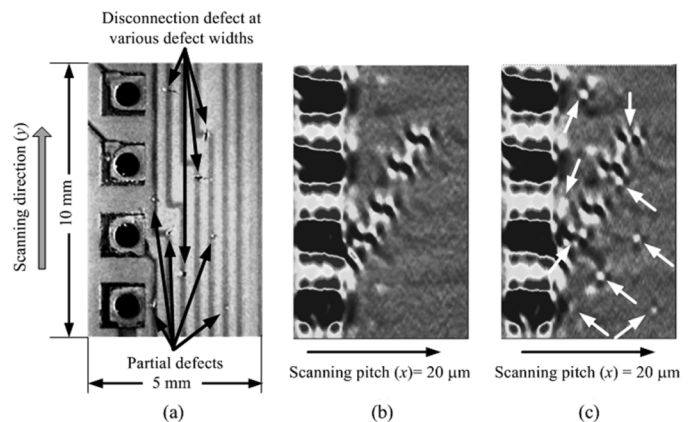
Sample PCB model and its inspection results at scanning speed of 0.05 m/s represented in 2-D image. (a) Photograph of the PCB model, (b) inspection result of the reference PCB model, and (c) inspection result of the tested PCB model with nine averaging signals.
